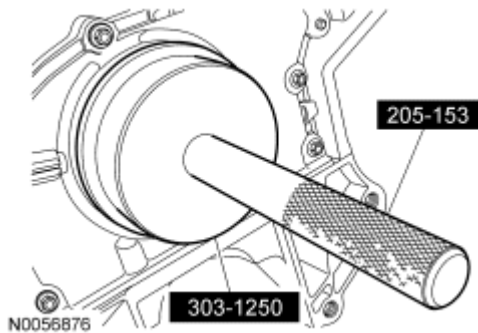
Installing New Crankshaft Rear Seal Using Special Tools (303-1250) & (205-153)
